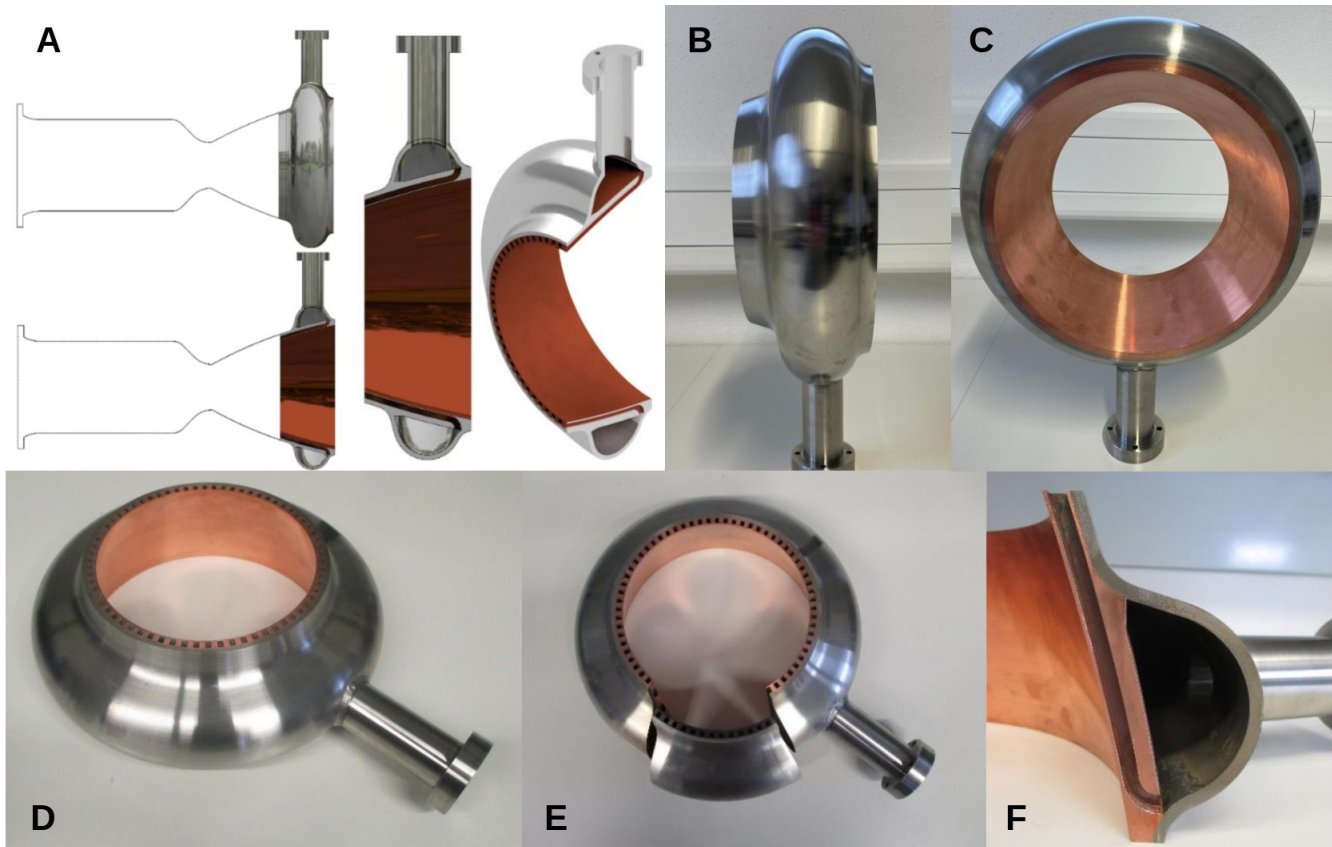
Cold spray additive manufacture (CSAM) bimetallic (CuCrZr/IN625) manifold demonstrator test piece.
